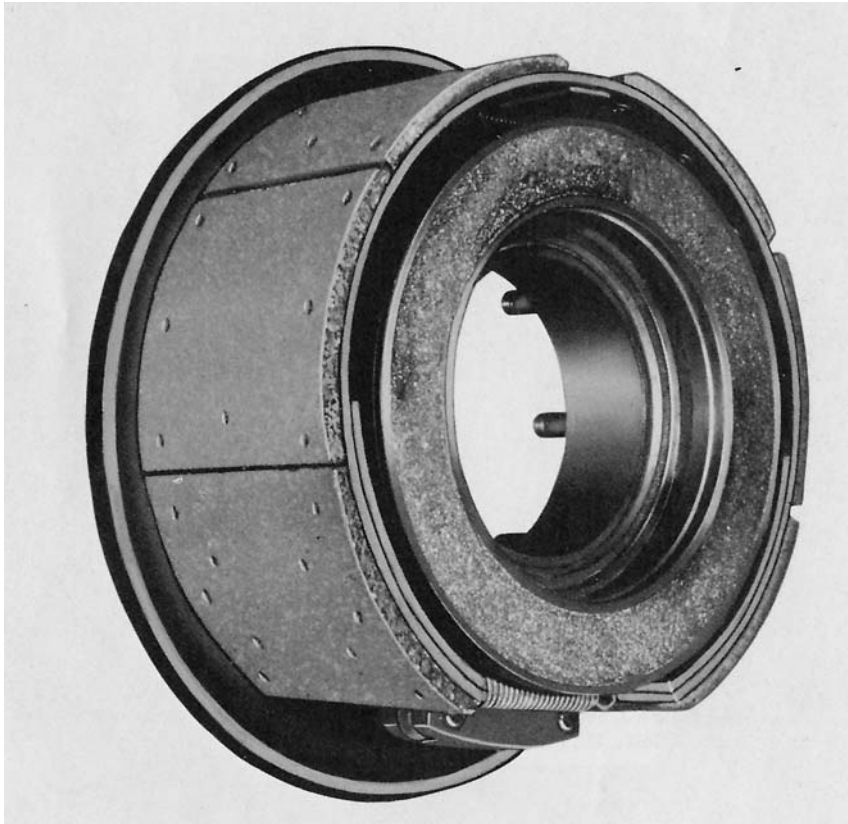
Electric drum brake activated by a cam and pin attached to the slightly rotating electromagnet. (Courtesy of Warner Electric Brake & Clutch Co., South Beloit, IL.)
